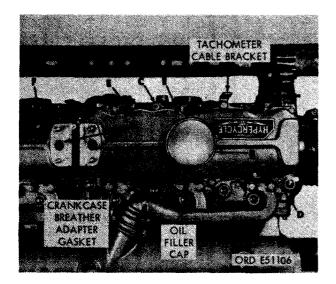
REMOVING FRONT AND REAR CYLINDER HEAD COVERS.
